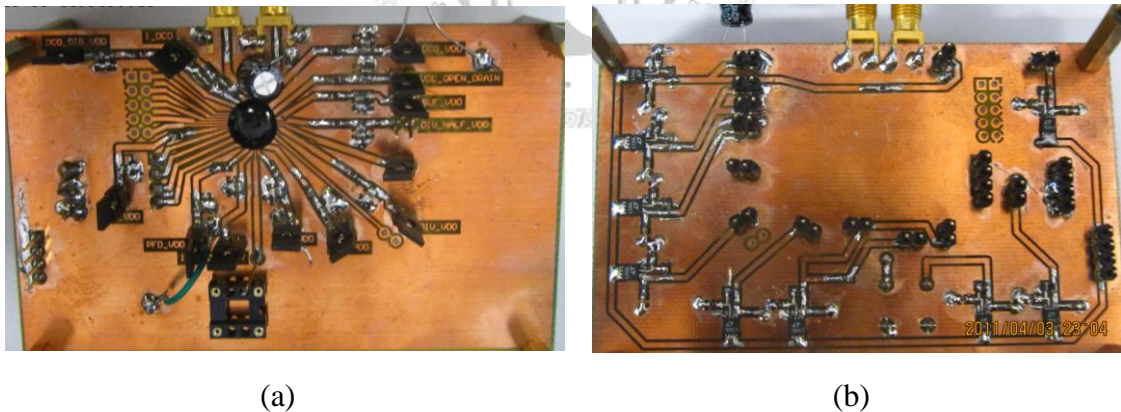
Fabricated PCB for measurement: (a) top view, and (b) bottom view.
